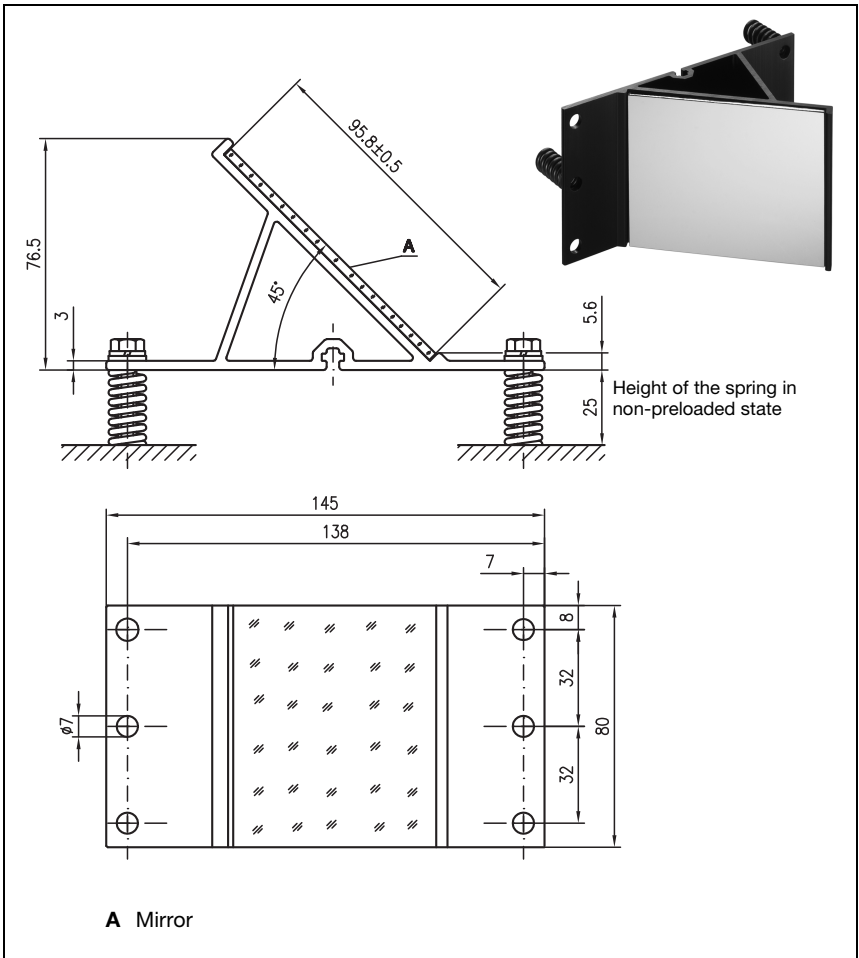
Photo and dimensioned drawing of the US 1 OMS deflector unit
